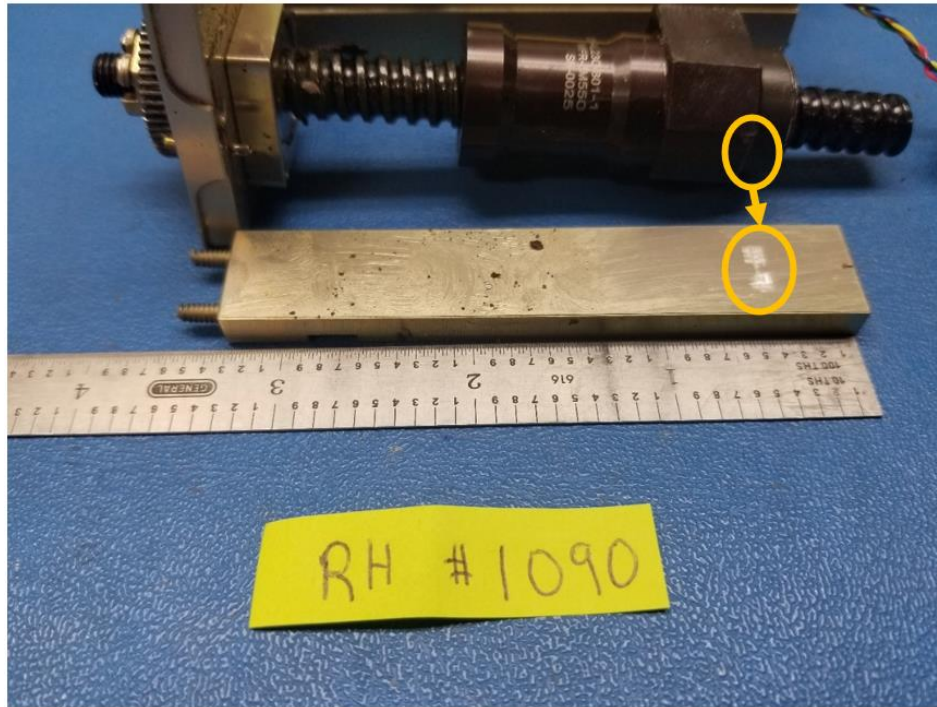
RH TCU actuator ball nut lower guide witness marks (excerpt from [3])
